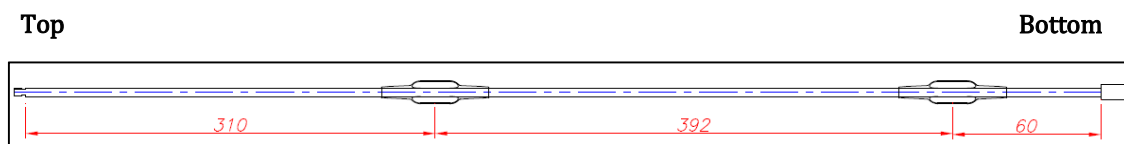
ROD GUIDE ASSEMBLY (13)
